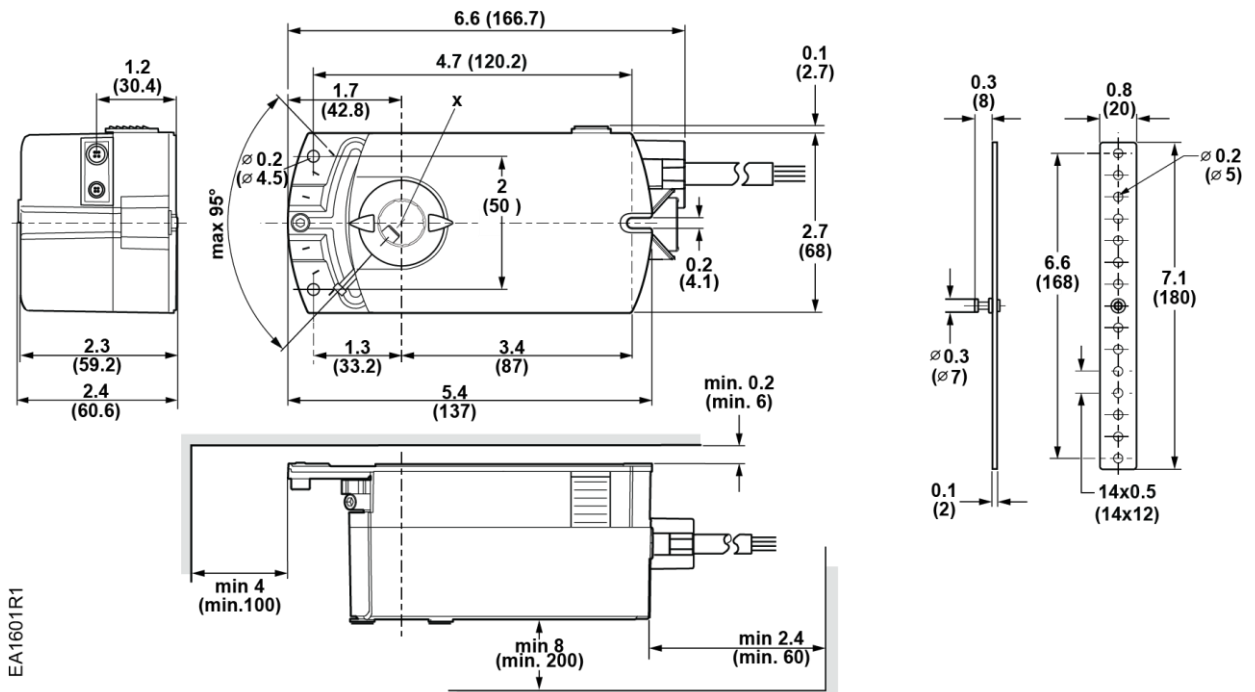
GDE Actuator and Mounting Bracket Dimensions in Inches (mm).
